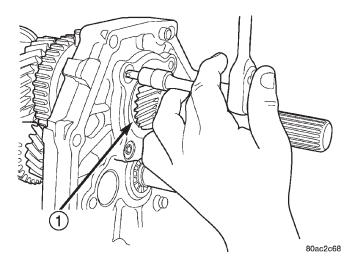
Remove Output Shaft Rear Bearing Retainer
